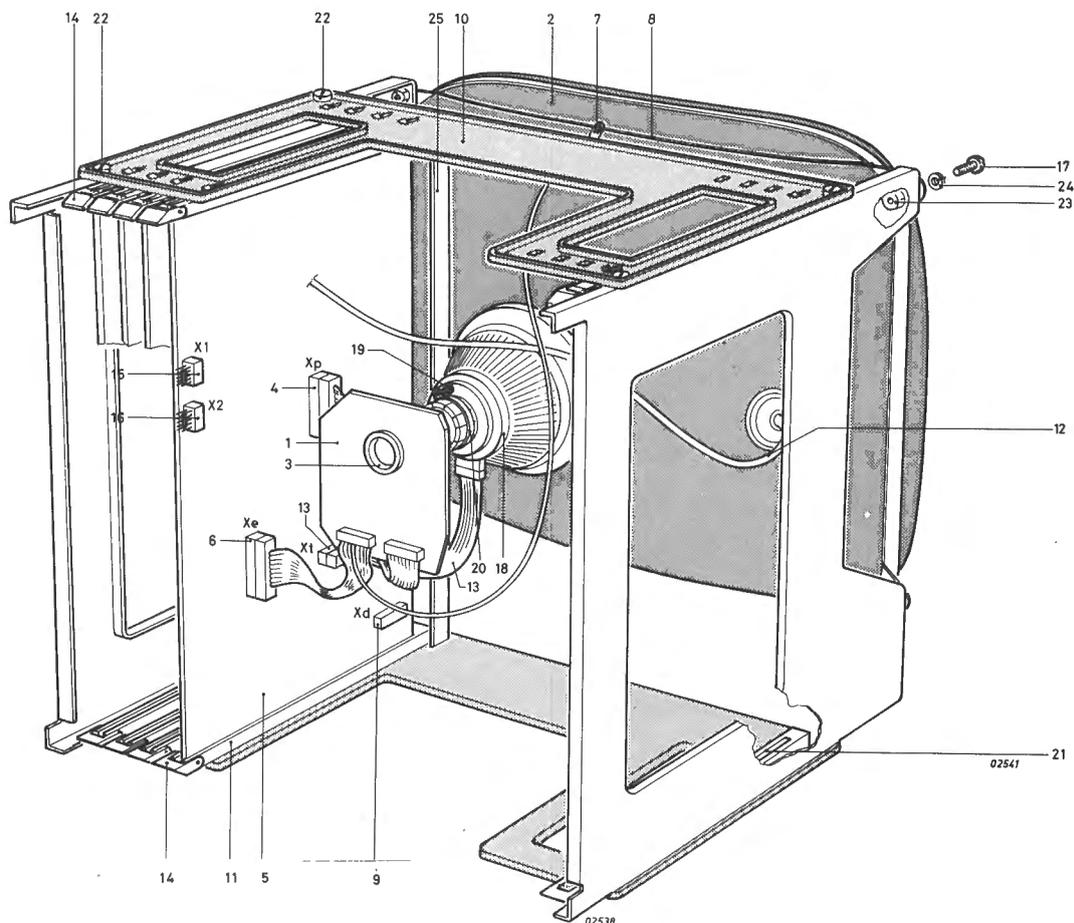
MONITOR - EXPLODED VIEW - 12 INCH
